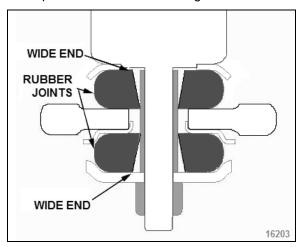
LOWER SHOCK MOUNTING BUSHINGS
